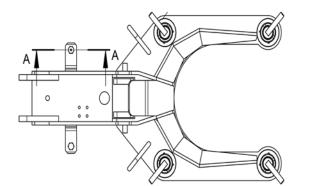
88345 Base Plate Welding Assembly
